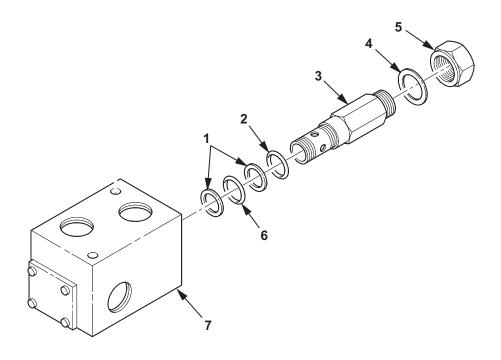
Pilot Relief Valve Disassembly and Assembly.
